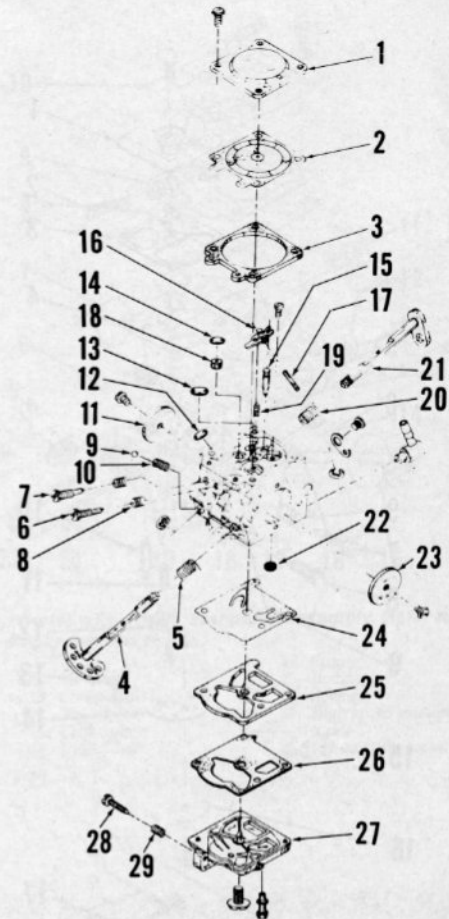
Exploded view of Walbro WT diaphragm carburetor.
